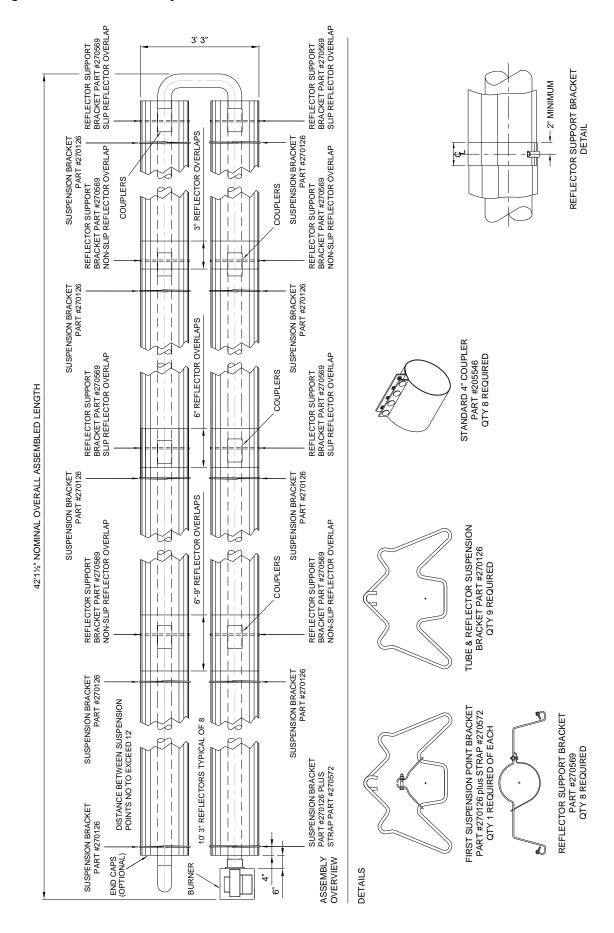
Heater Assembly: Model U tube 170-U80 and 200-U80
